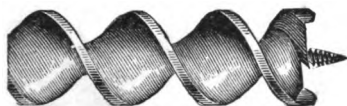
NO. 36—PERFECT BORING MACHINE AUGER.
